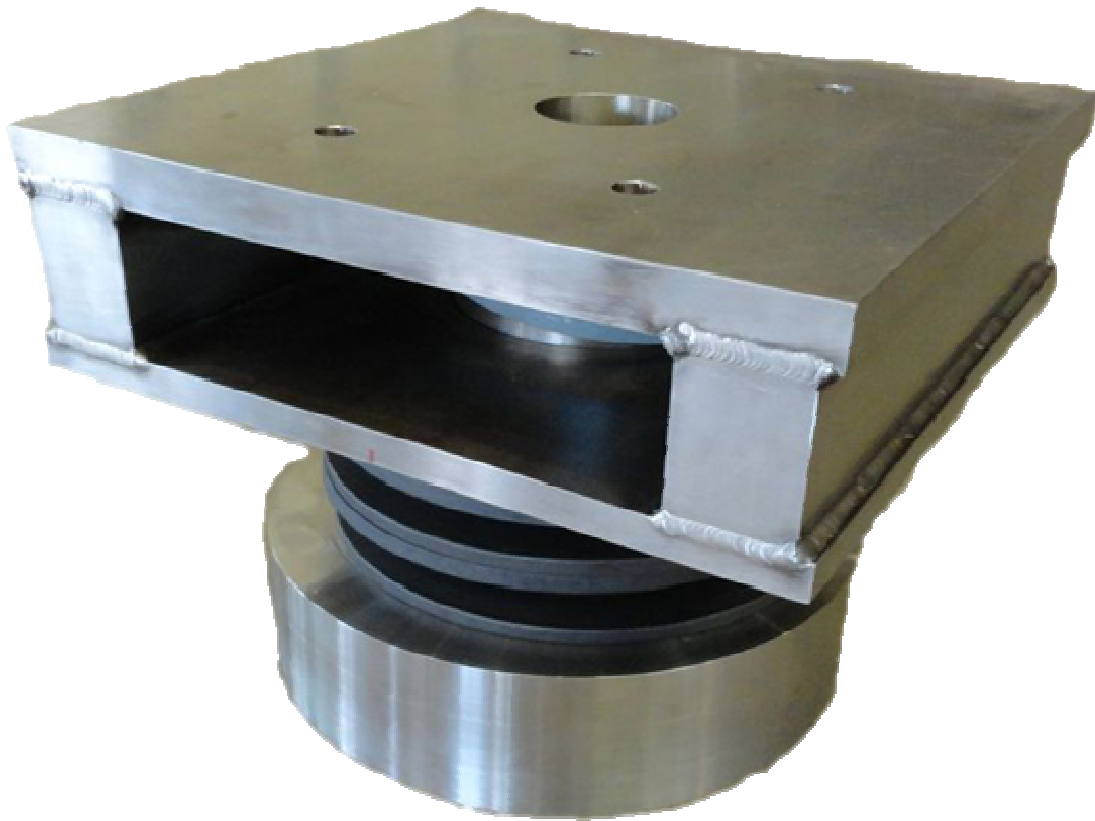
The spring pack assembly is to be welded together per instructions denoted in sub-assembly drawing 2006C.
